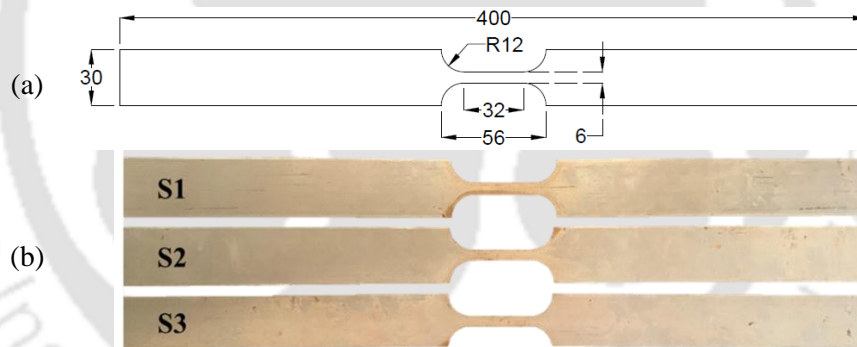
Dog-bone specimens used for tensile test (a) geometry (dimensions in mm) (b) actual image
